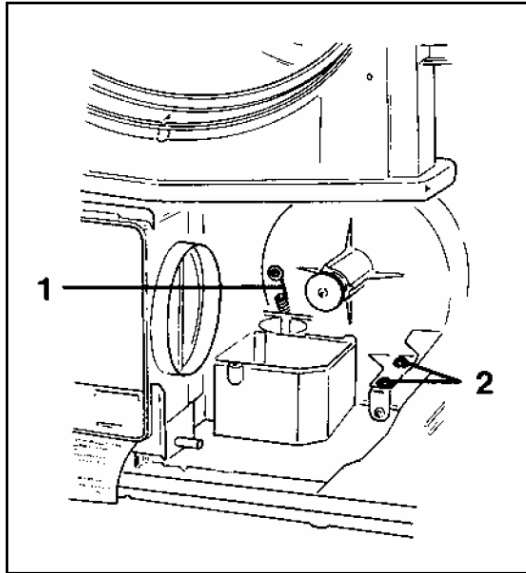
Cooling Fan Removal 1 (Machine Nos. without Prefix)
